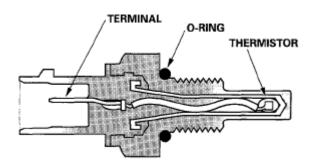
Sectional View Of Engine Coolant Temperature (ECT) Sensors 1 And 2 Courtesy of AMERICAN HONDA MOTOR CO., INC.
